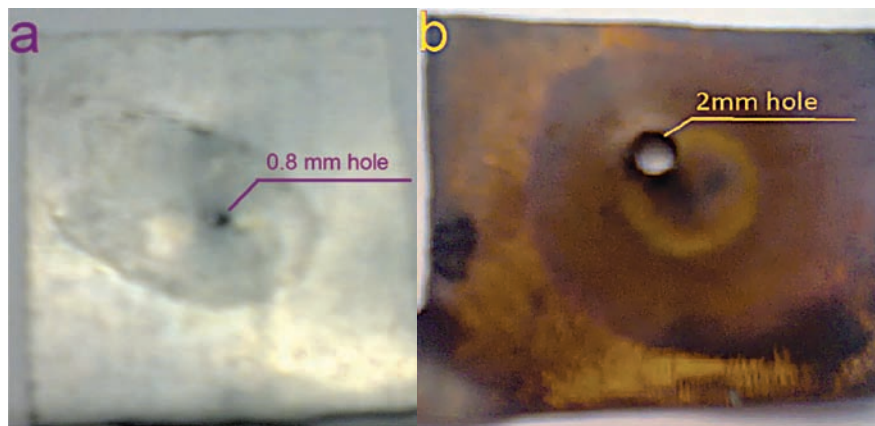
(a) Aluminium with 0.8mm hole (b) Copper strip with 2 mm diameter hole
